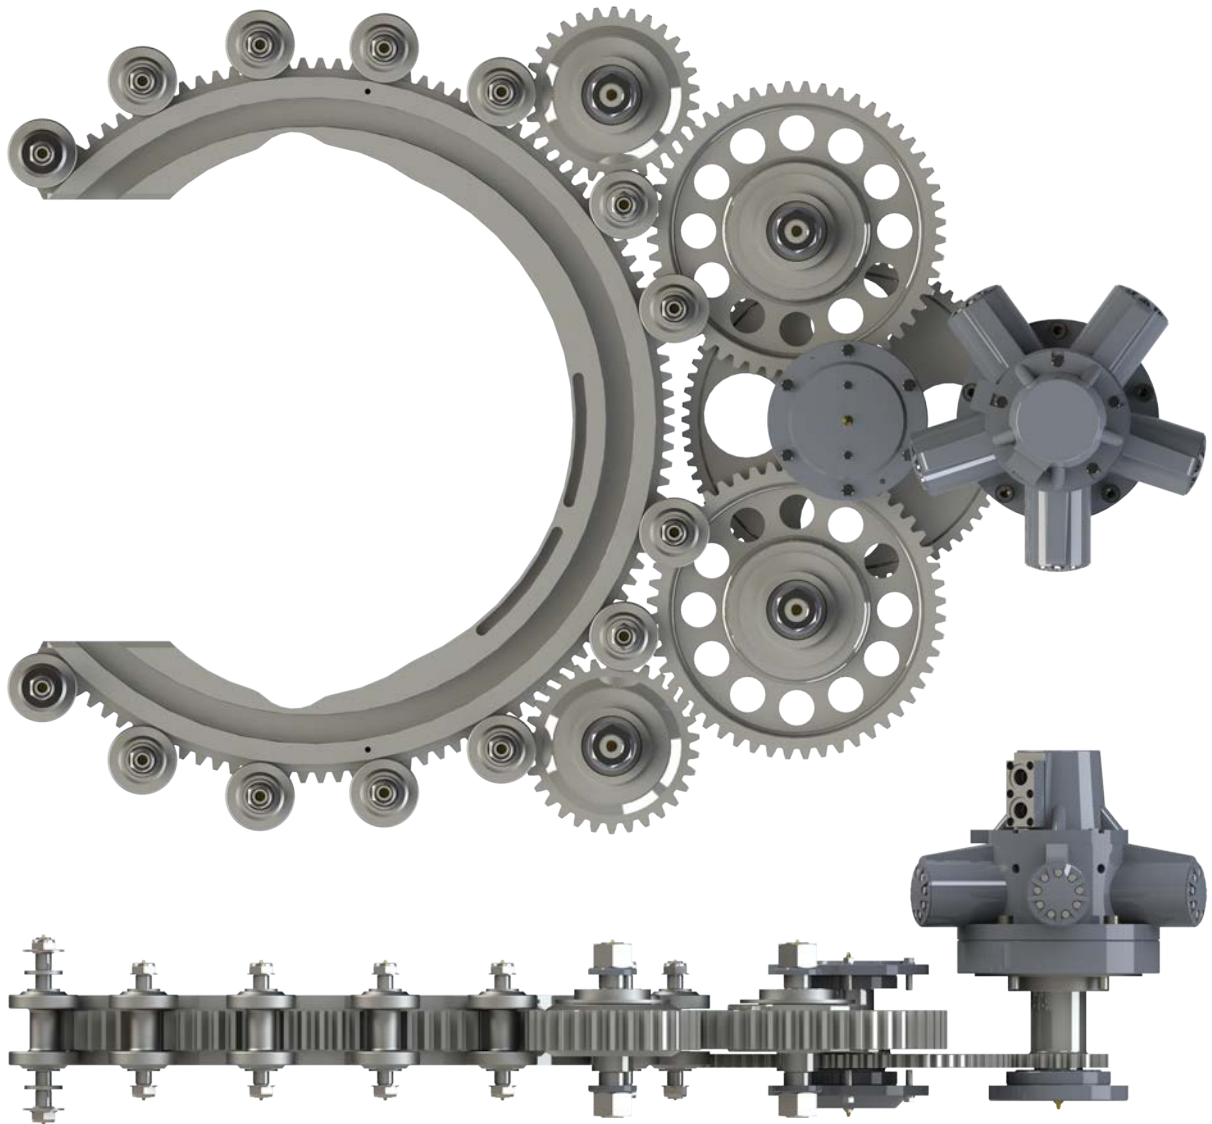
80-1402 HD31-80K Gear Train Top & Side View
